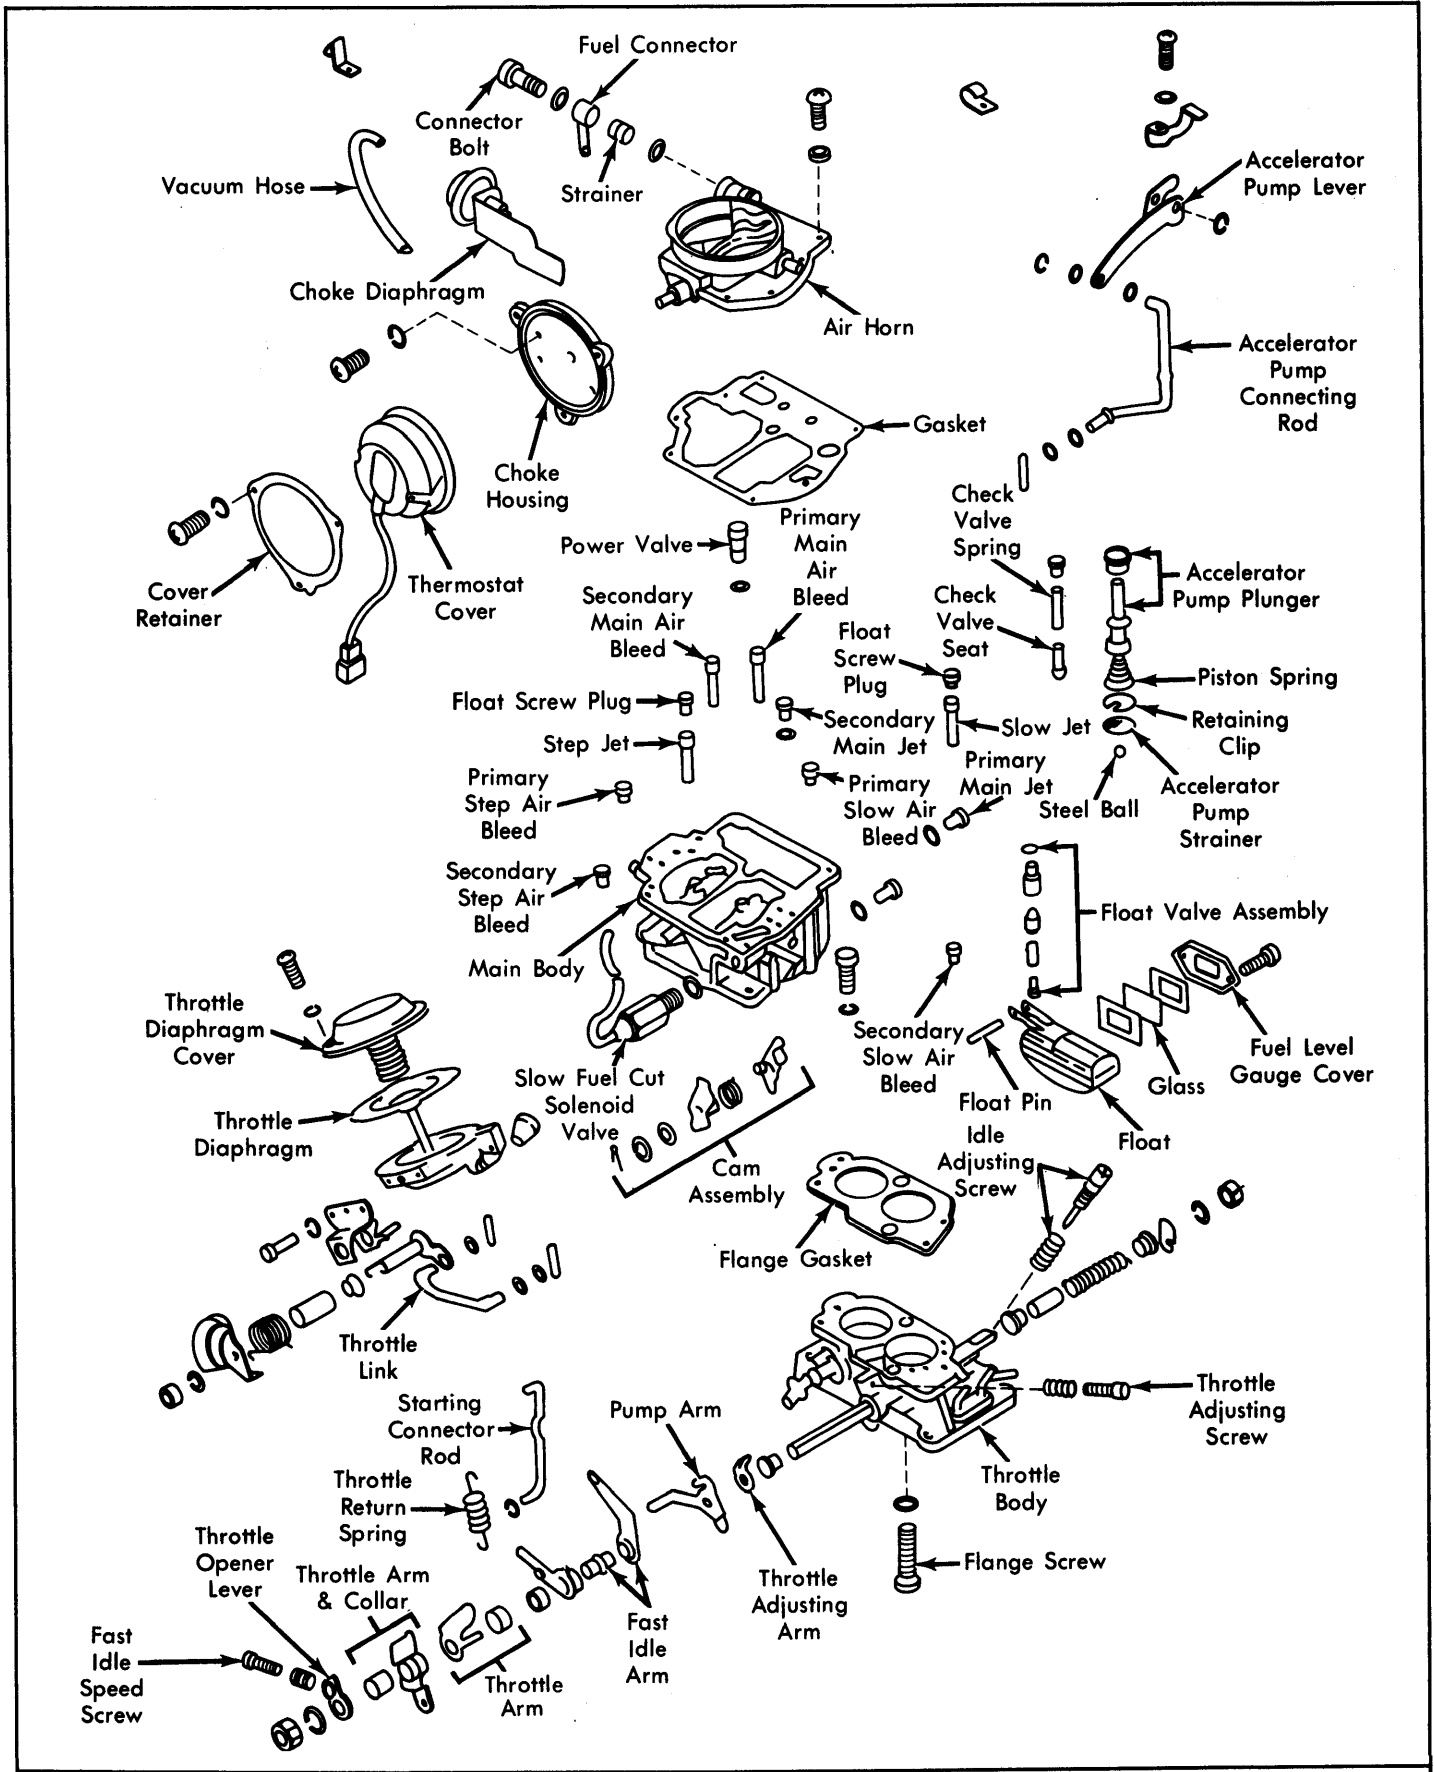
Exploded View of Nikki 2-Barrel Carburetor (Mazda 626)
